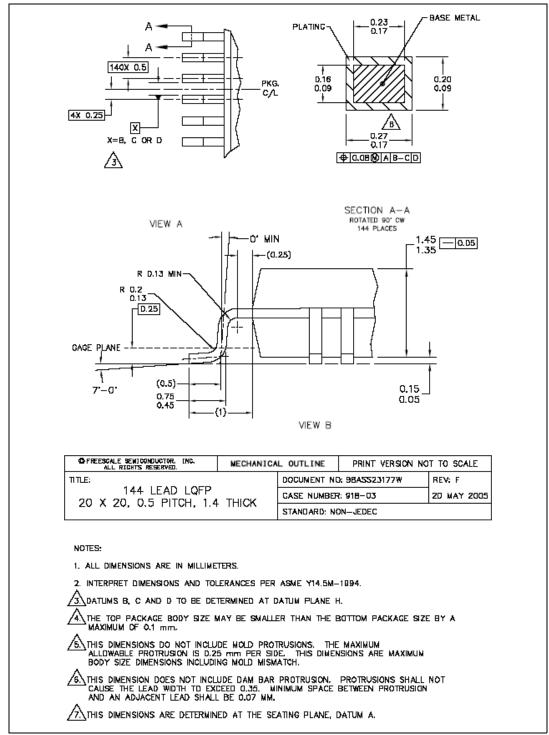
144 LQFP package mechanical drawing (2 of 2)
